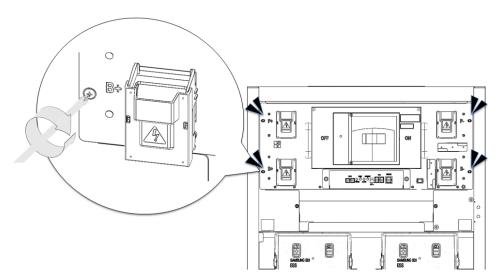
Attaching a Switchgear Assembly to a Rack Frame
